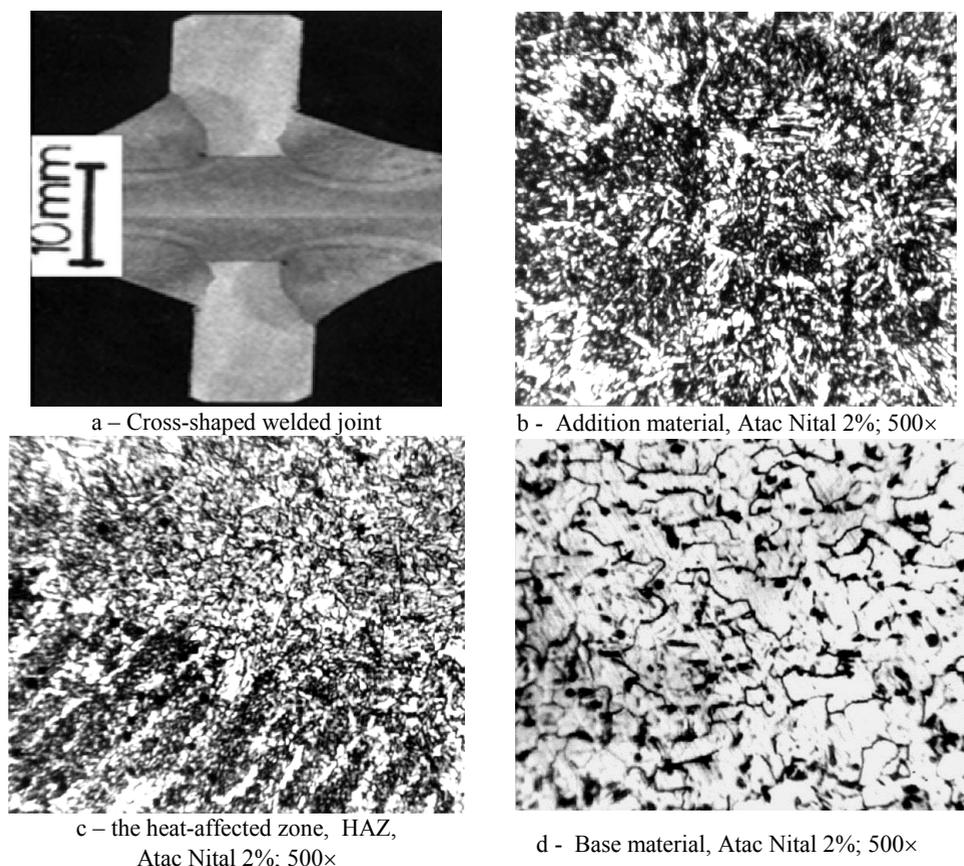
The metallographic structure of materials in the cross-shaped welded joint - sample 6.
